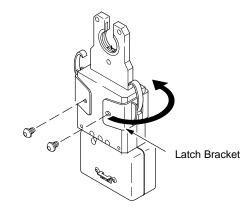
Removing Series 8 Micro Weld Head Latch Bracket
